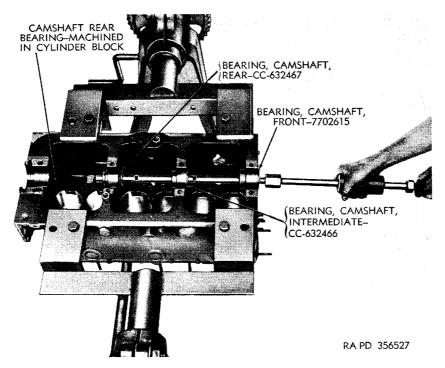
Removing camshaft bearings with remover and installer-41-R-2386.
